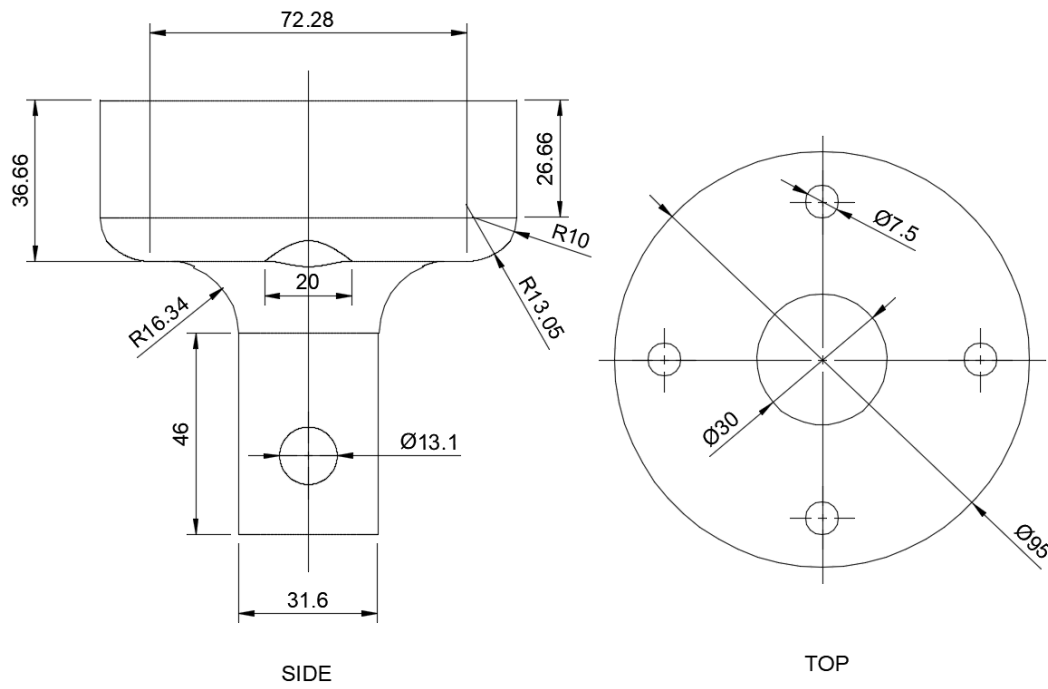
Drawing of the bottom 3D-printed jig with dimensions. All dimensions are in millimeters.
